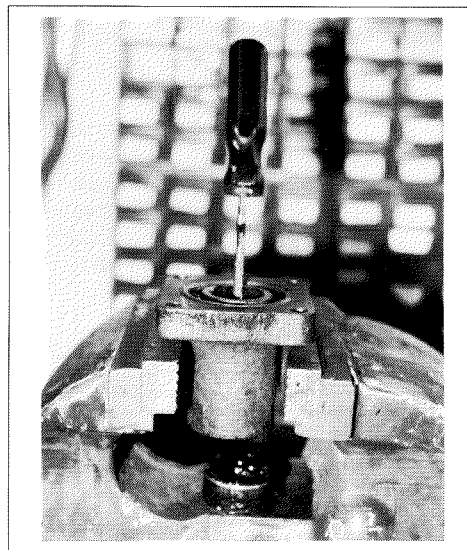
Holding the housing in a vice, drift out the inner oil seal, followed by the needle bearing. I am not really using a screw driver! Turn the housing over and drift out the large roller bearing. Keep the old bearing for now.
